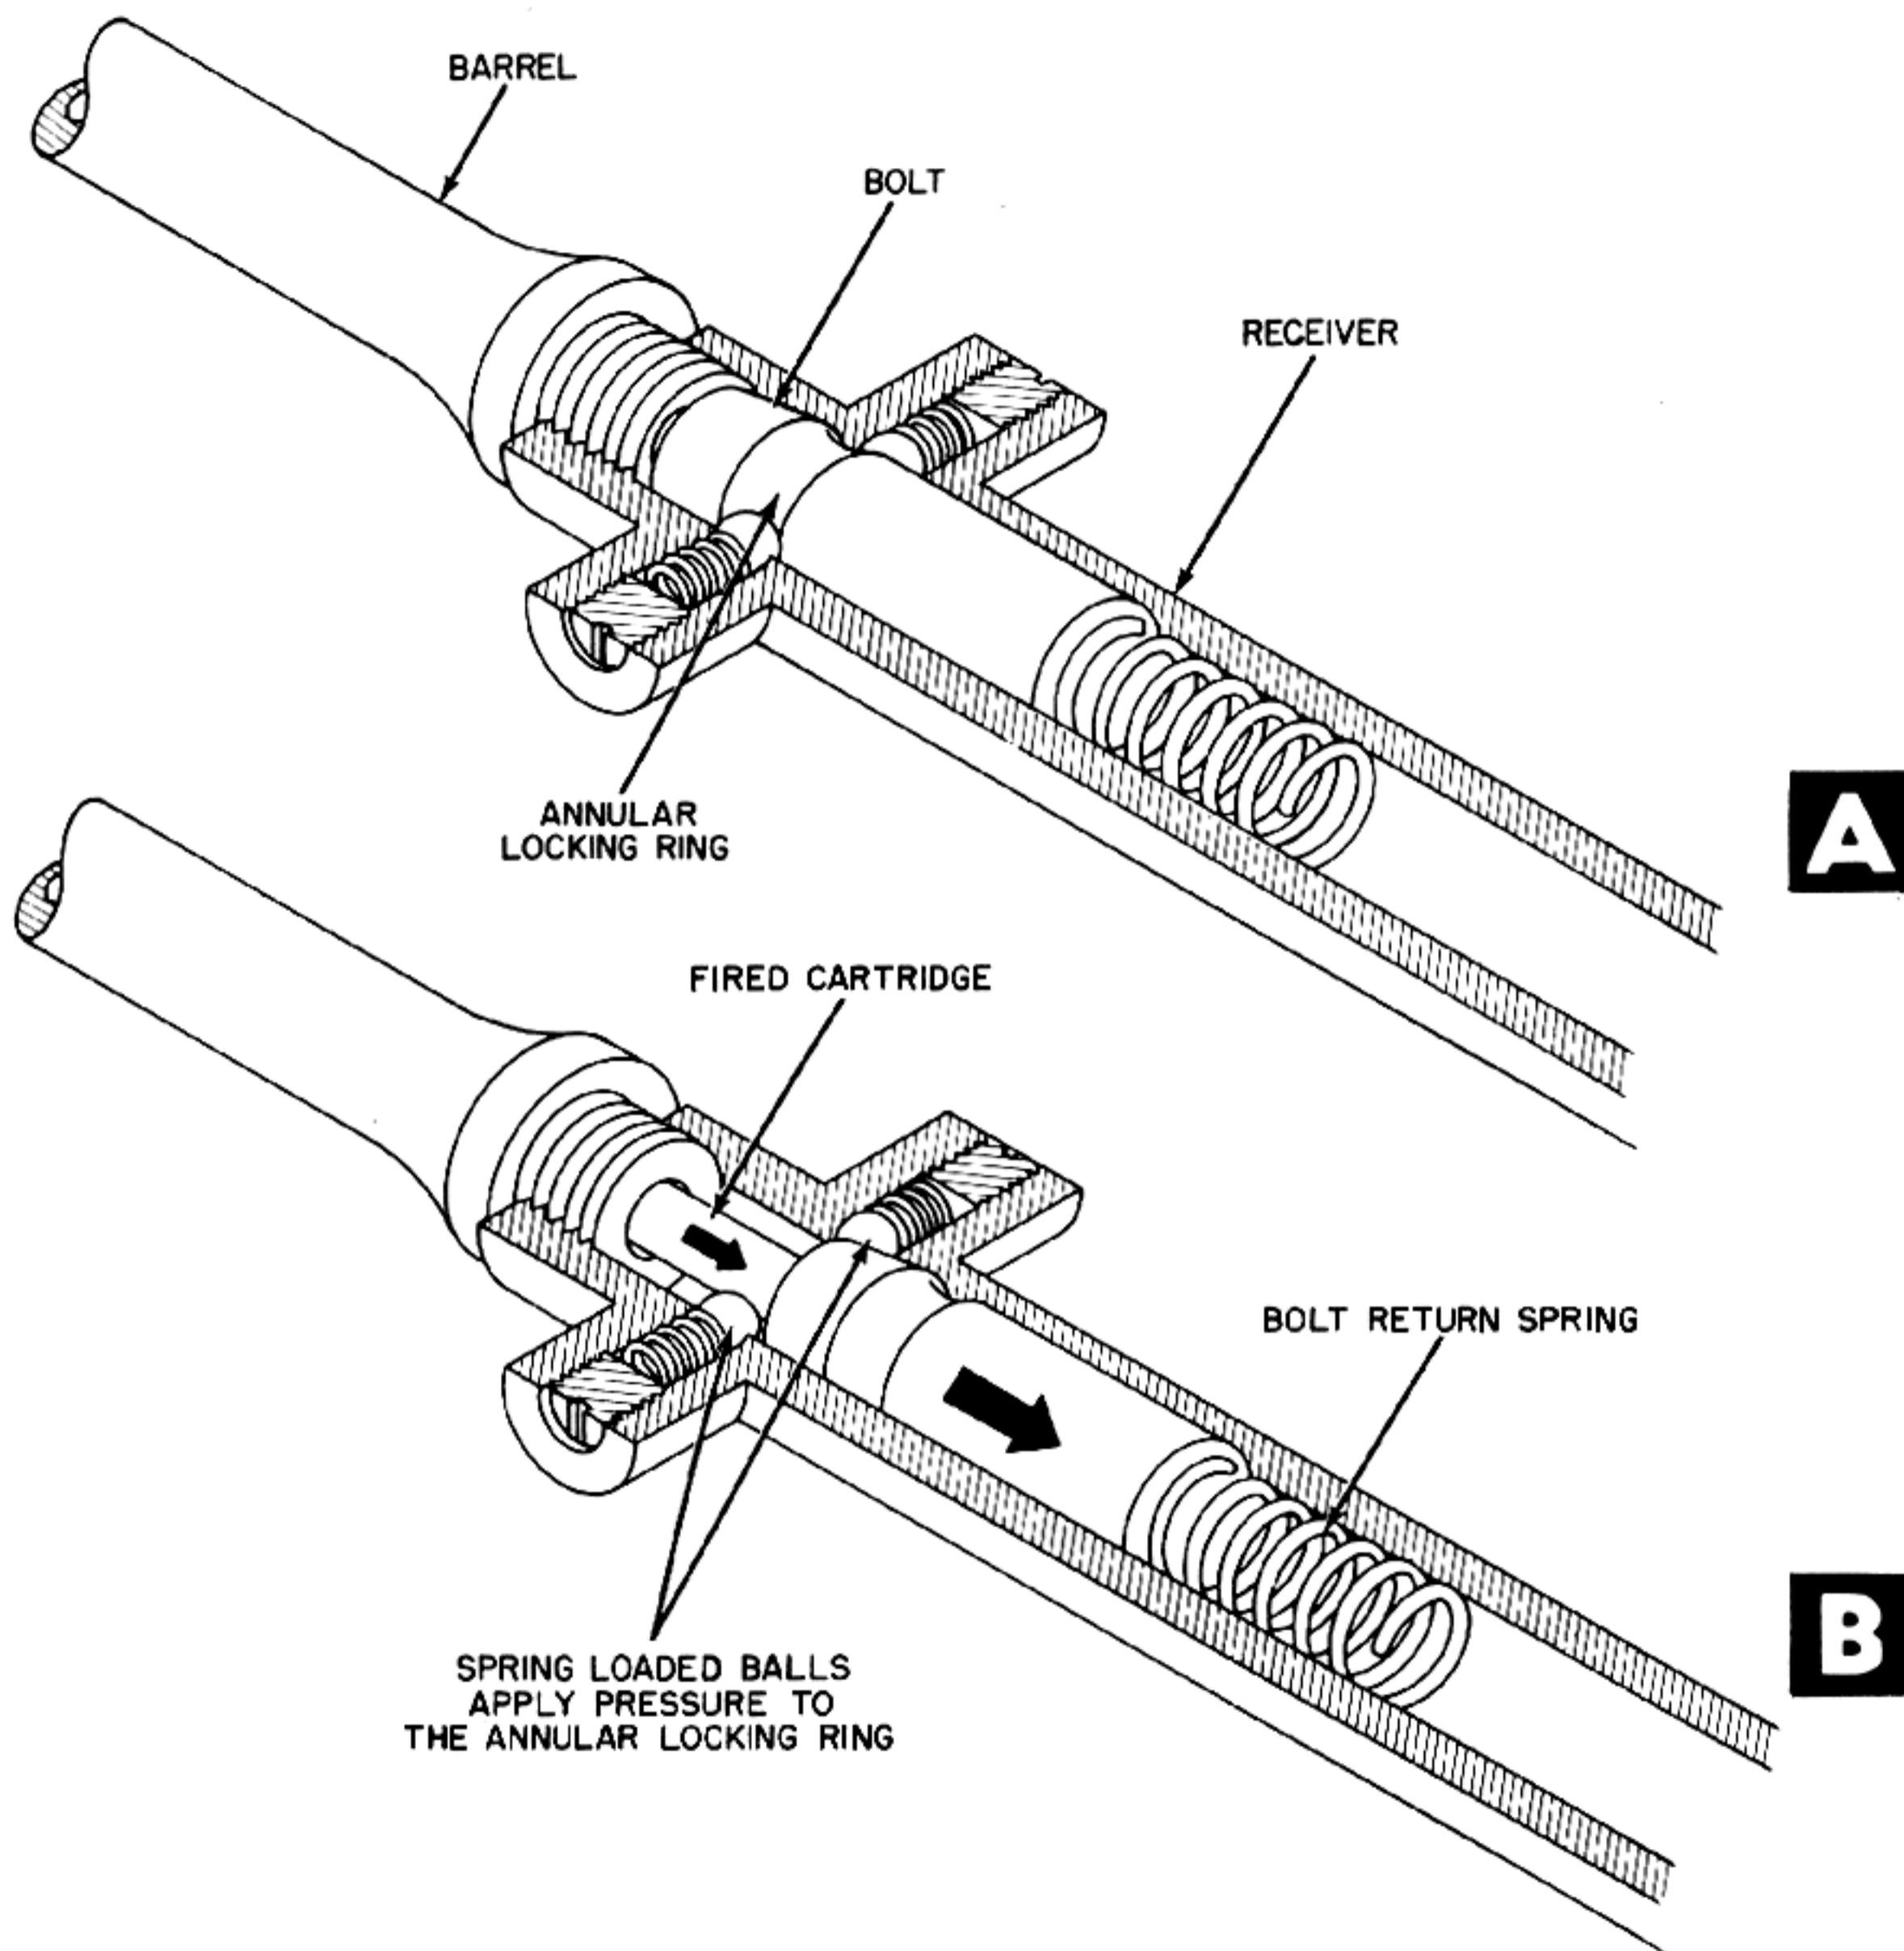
Spring-Loaded Balls Retard Recoil of Bolt.
